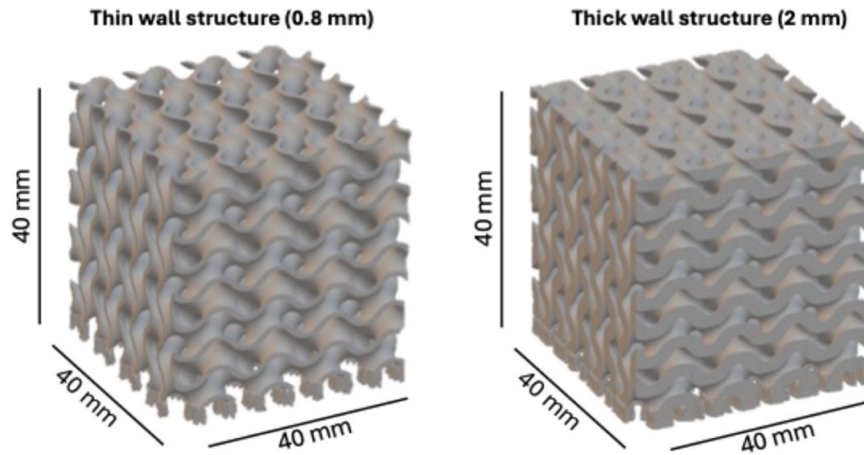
Thin wall (left) and thick wall (right) gyroid lattice structures used in the study.
